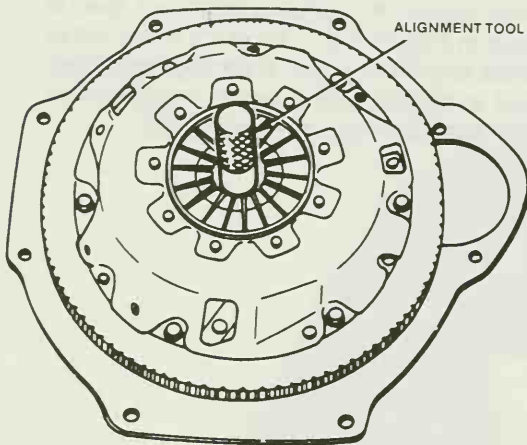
An alignment tool is used to center the clutch disc. (Chrysler Corporation)
